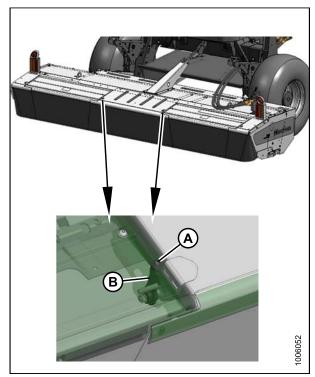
Export Headers: Latch on Cutterbar Doors
